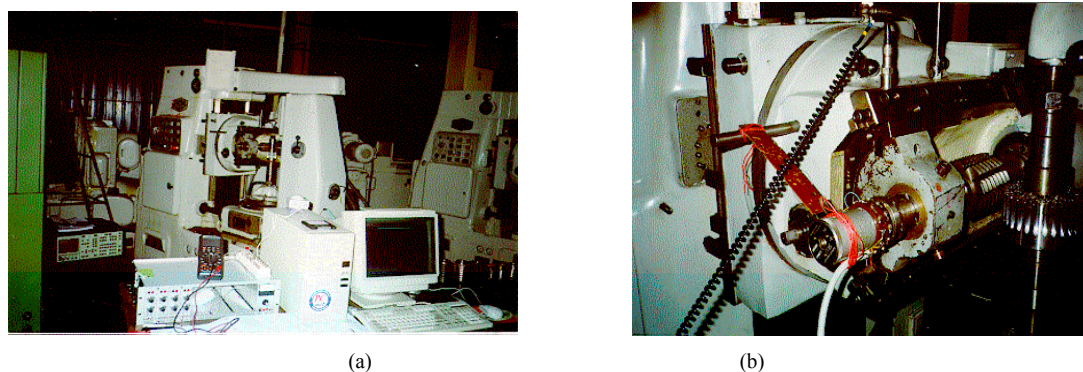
(a) Measurement system (assembly view), and (b) signal collecting system
